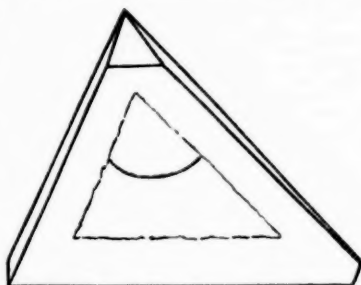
Drawing from photograph of specimen broken open, showing apparent thickness of crust, and shape and size of bubble. Magnification, $\times 1\frac{1}{2}$ diameters.
